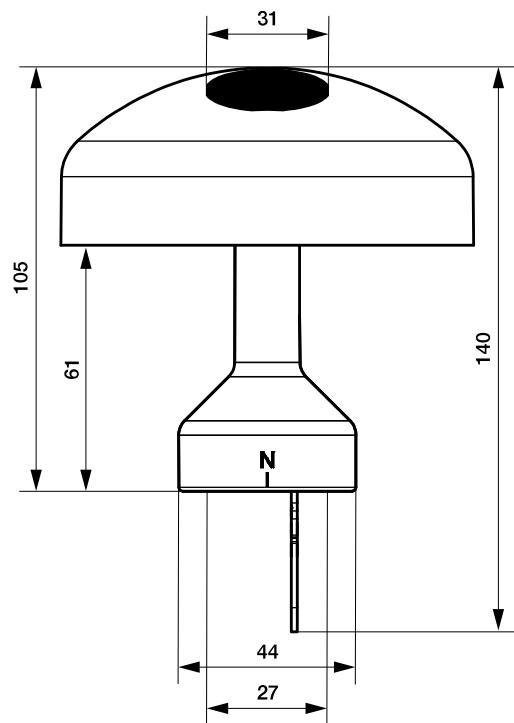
Dimension drawing for Weather Sensor WES/A 4.1.1
